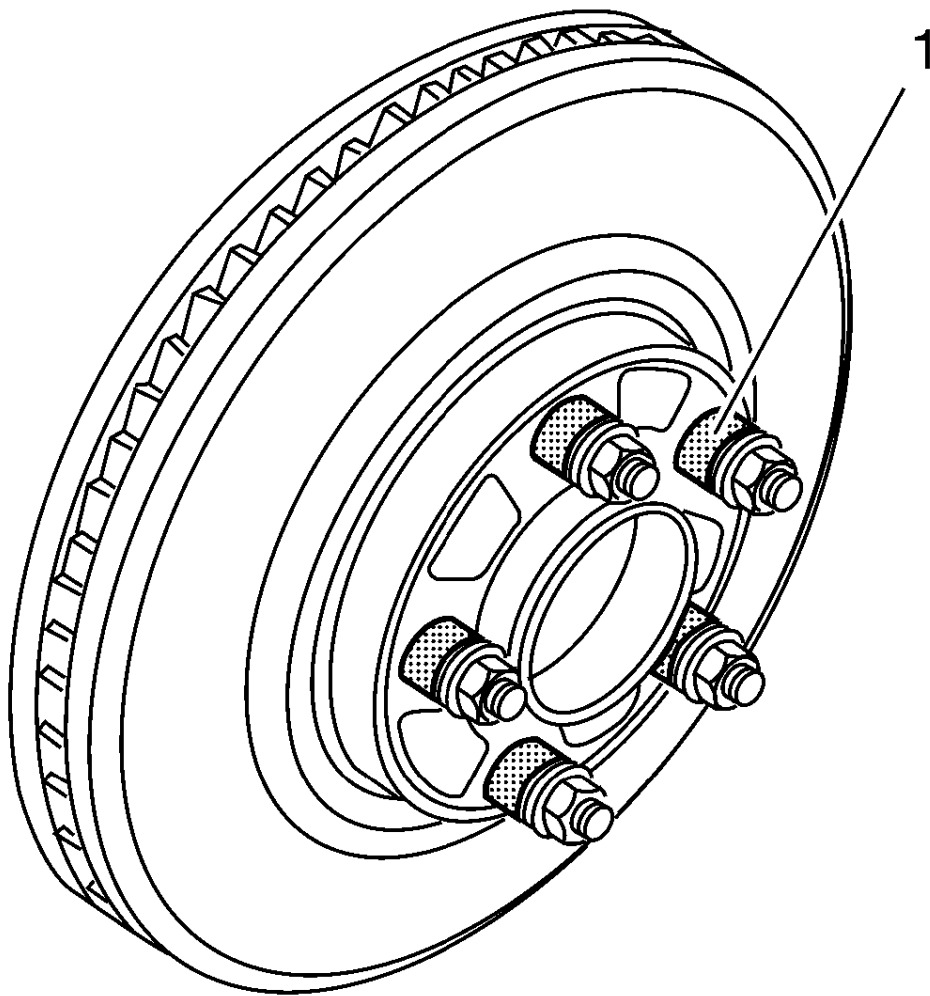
Conical Brake Rotor Washers And Lug Nuts
